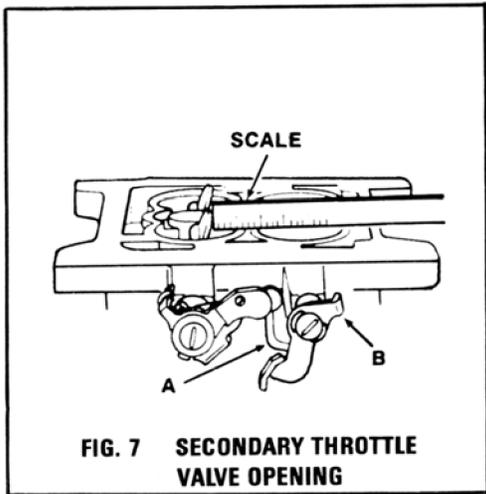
SECONDARY THROTTLE VALVE OPENING
